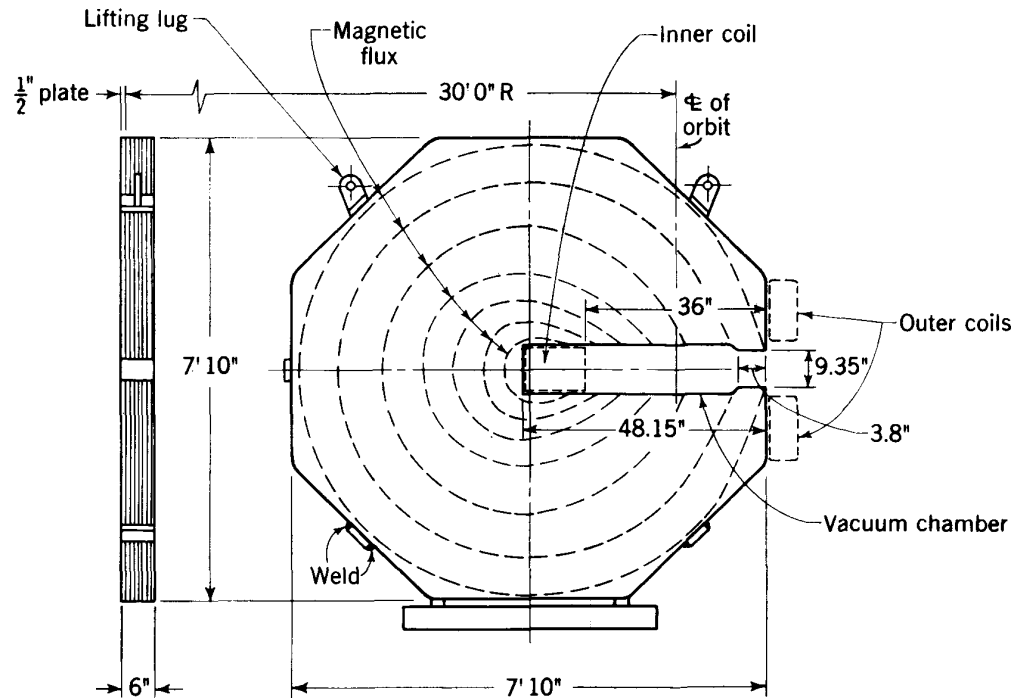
Iron magnetic circuit for the cosmotron, showing assembly in bundles of 12 half-inch plates.
